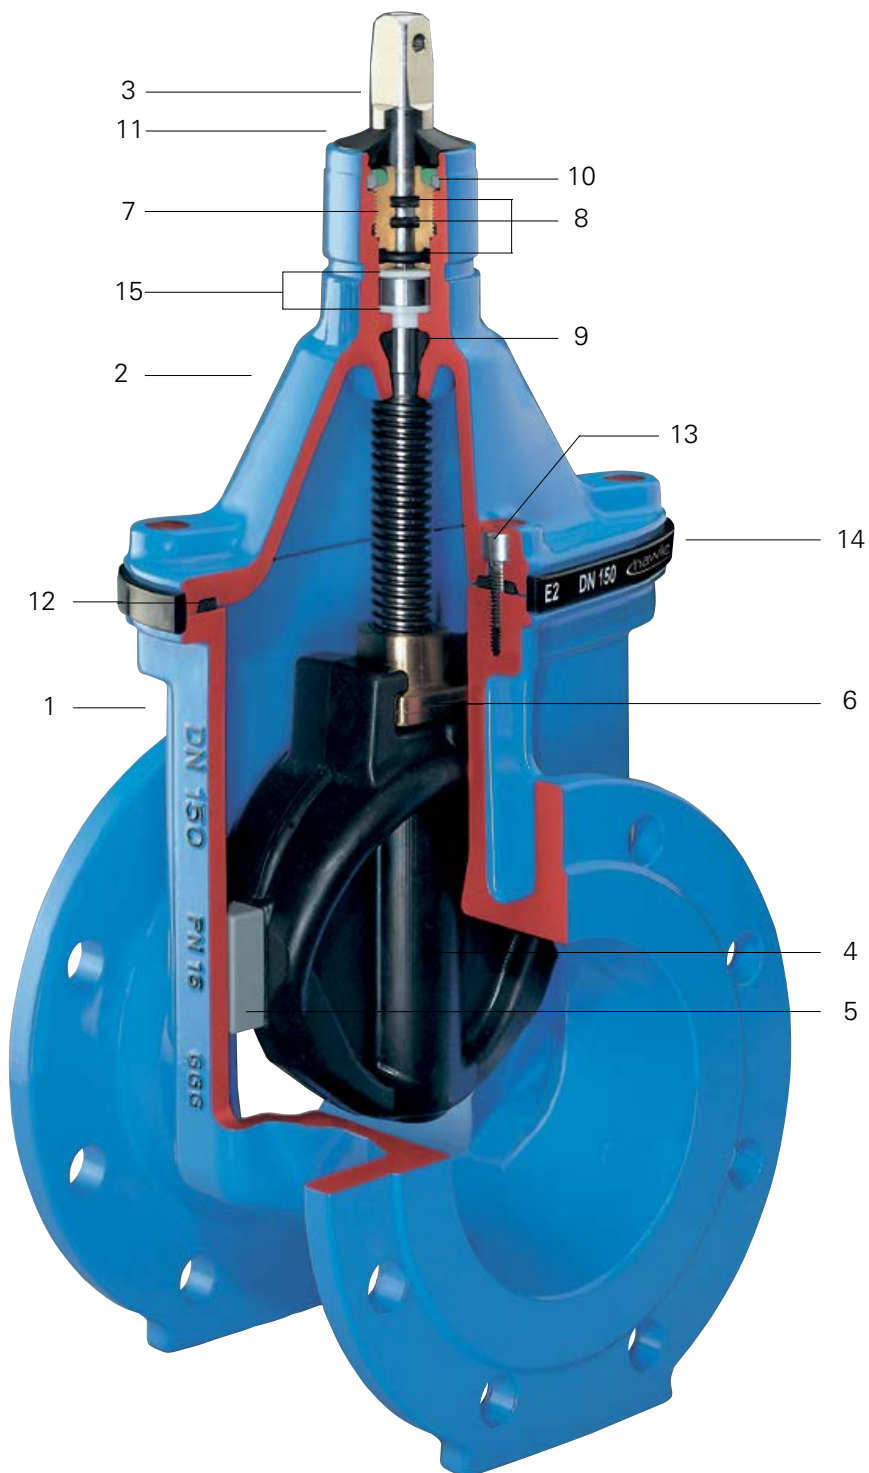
Hawle E2 Valve Flanged Ends DN50 - DN200
